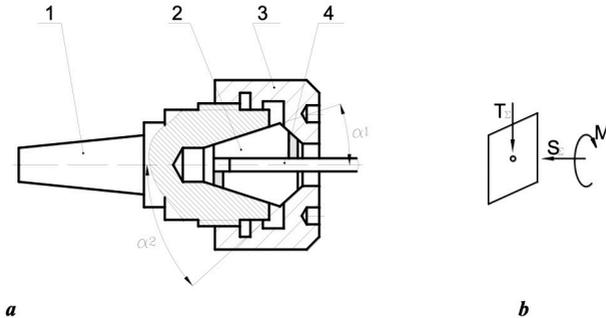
Collet drill-milling chuck (a) and power flow diagram in it (b): 1 - case; 2 - double cone collet; 3 - persistent nut; 4 - tool
